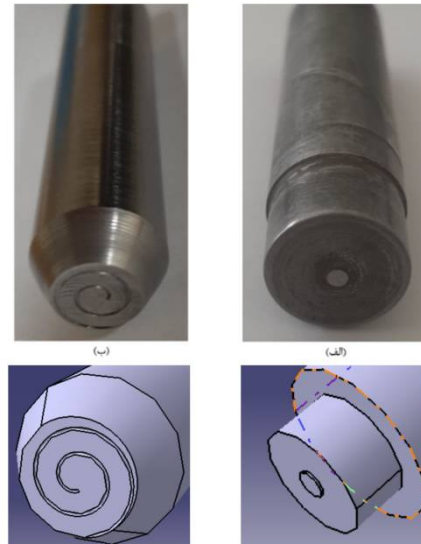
Tools used for experiments: (a) pinned tool; (b) pinless tool
